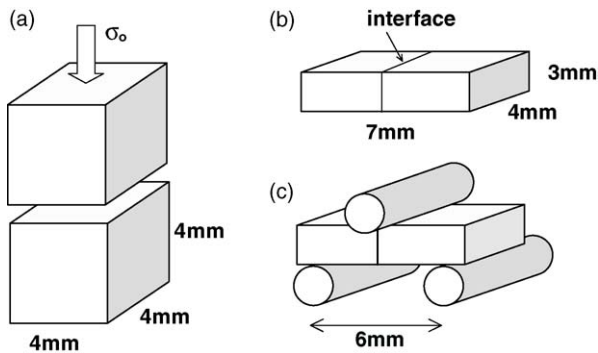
Details for the geometries and the dimensions of (a) test specimens in joining, (b) flexural test specimen, and (c) three-point flexural test.
